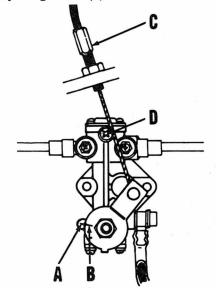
With throttle wide marks (A&B) will align on correctly ad justed oil pump. Loosen bleeder screw (D) to remove air from system.
